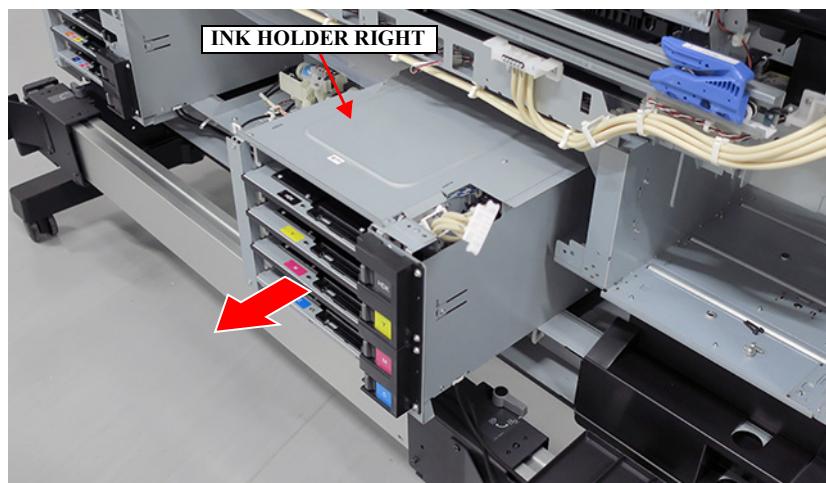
Removing the INK HOLDER RIGHT (8)
